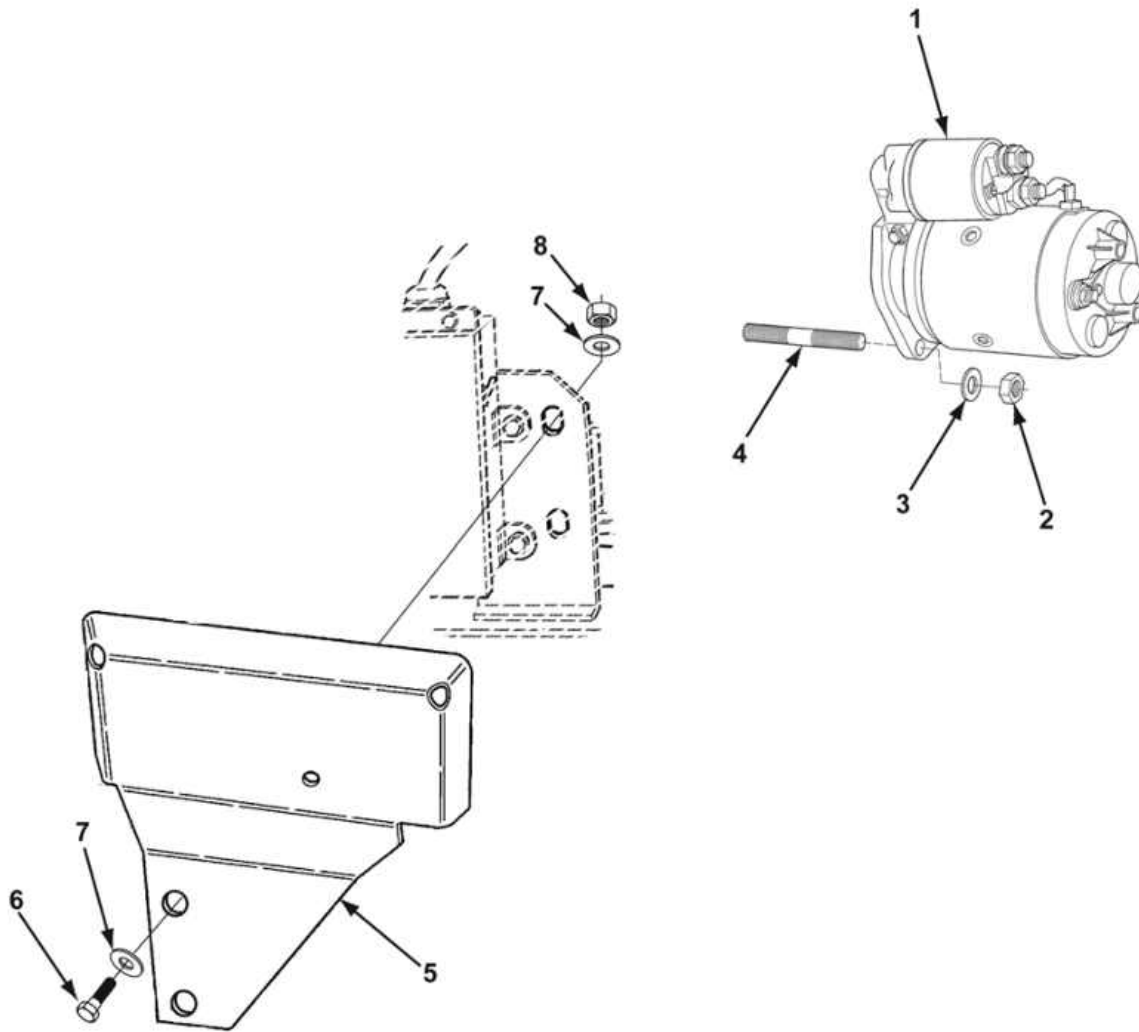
STARTING MOTOR AND MOUNTING HARDWARE
